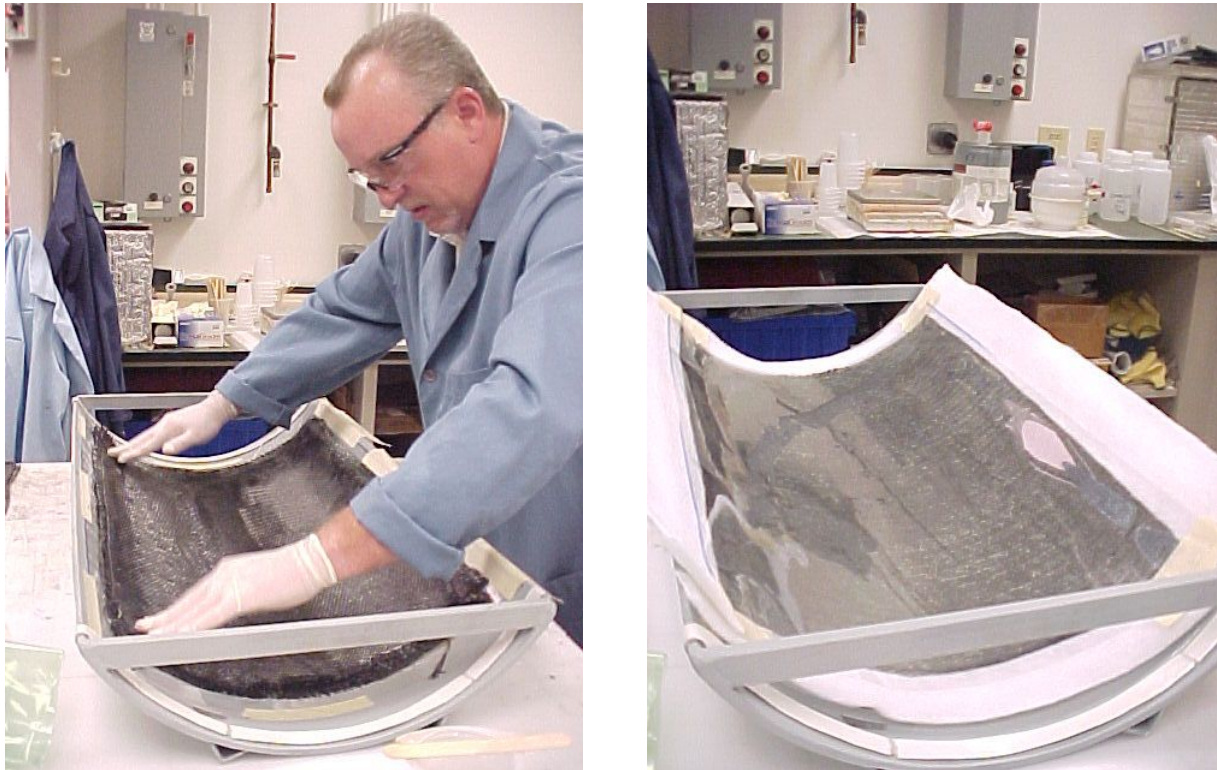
Patch Design 3 Installed in Pipe Section
